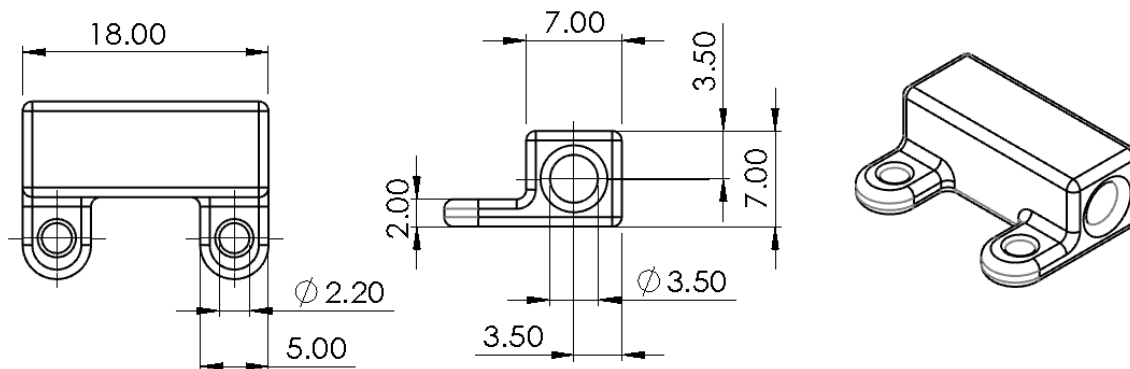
Design drawings of the sensor applicator with dimensions in mm; the edges are rounded, the tolerance for all dimensions except the screw holes is 0.10 mm, the screw holes should have a clearance fit (H7/h6) .
